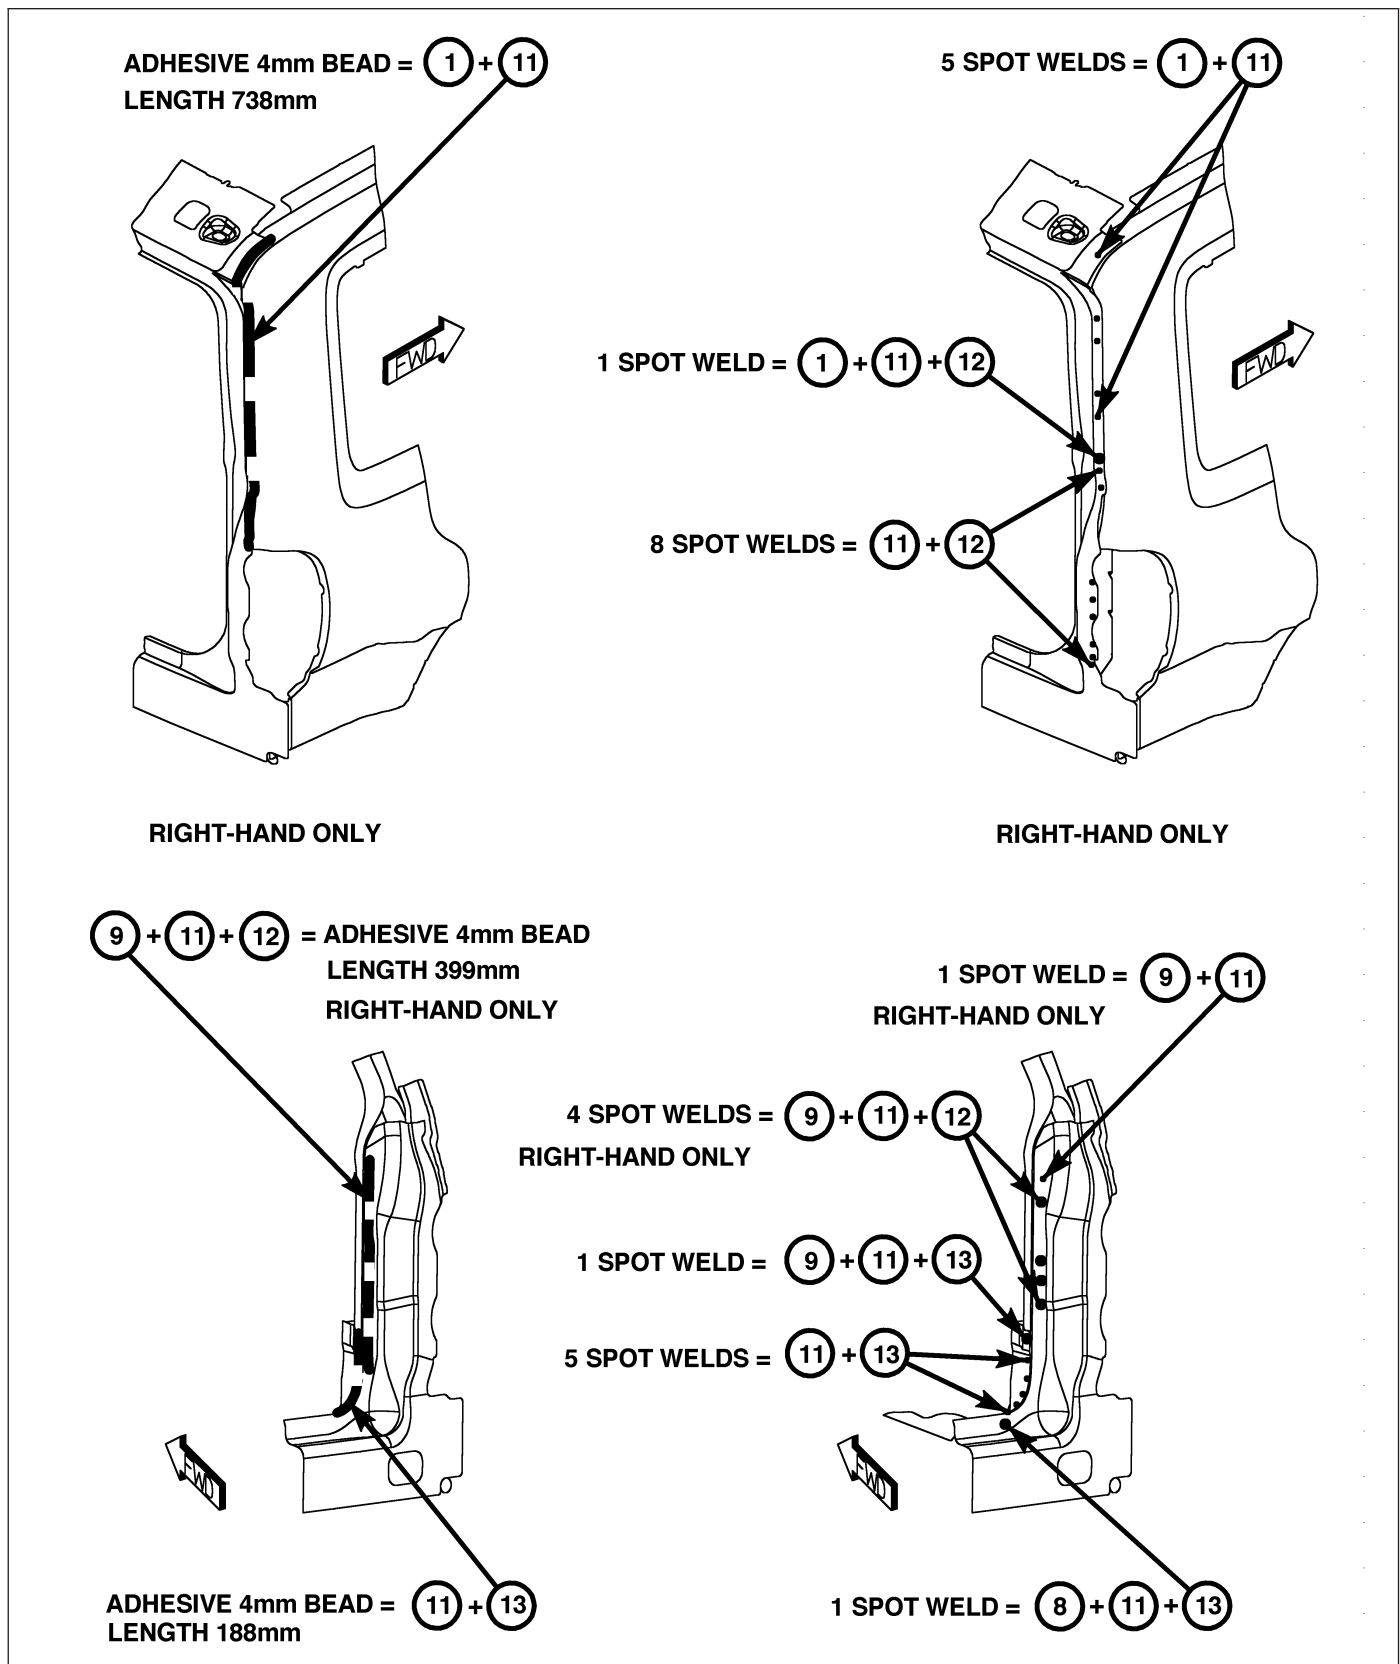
SWING GATE OPENING PANEL; GATE STRIKER REINFORCEMENT; D-PILLAR REINFORCEMENT ADHESIVE AND WELD LOCATIONS
